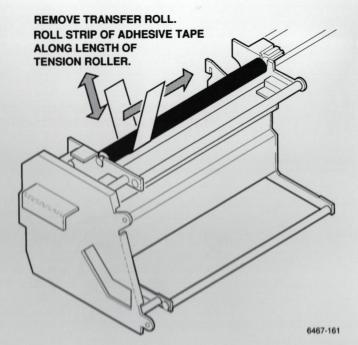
Cleaning the Transfer Roll Tension Roller.
